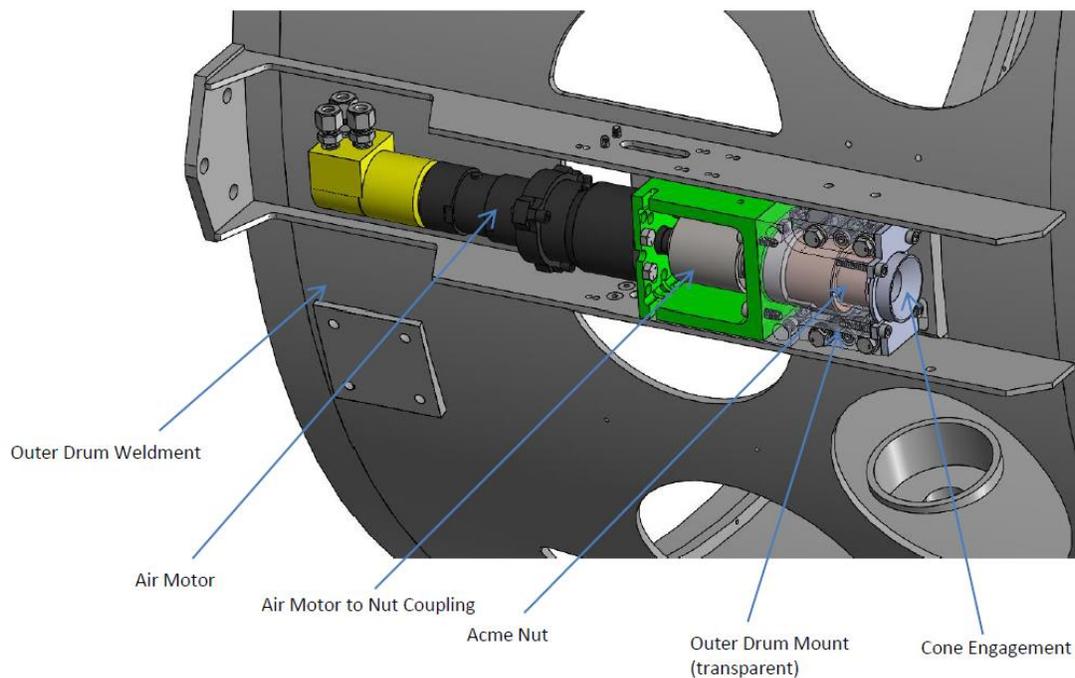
K1DM3 tertiary tower engagement mechanism, cone type. Outer drum mount shown as transparent to show internal parts
